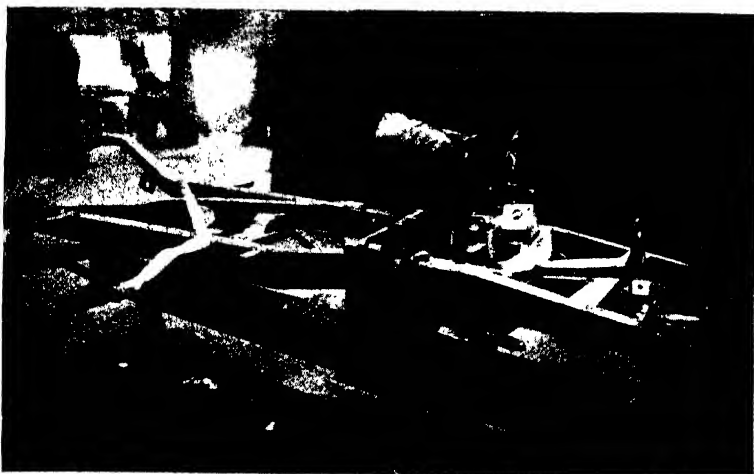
WELDING ON THE FINISHING JIG
